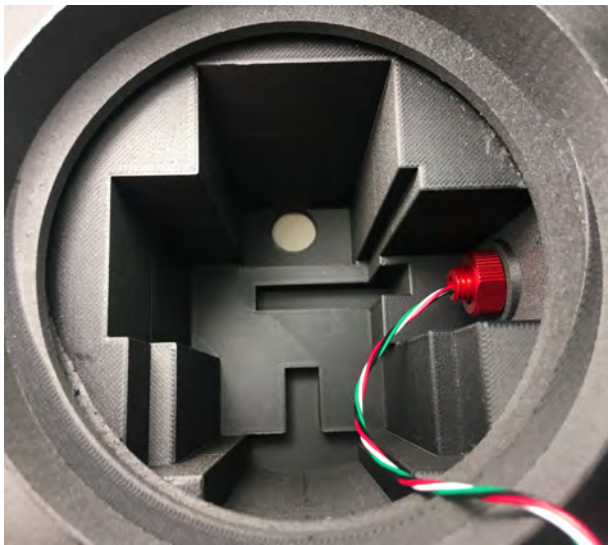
The inside structure of the 3D-printed housing with the pressure sensor mounted with a nut from the inside.
